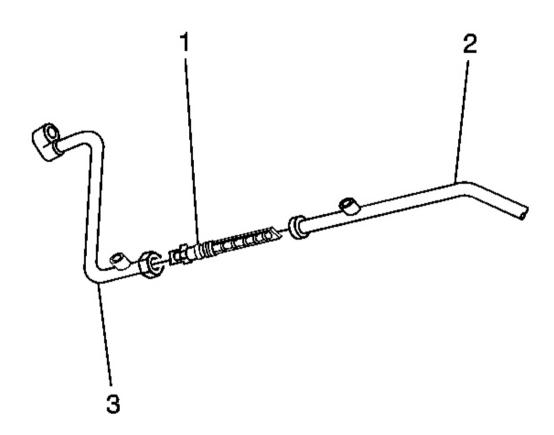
Locating Evaporator Tube Courtesy of GENERAL MOTORS CORP.
